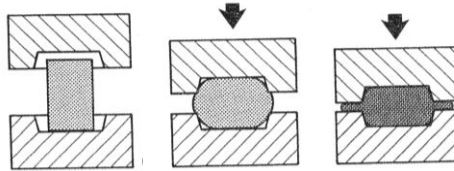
Schematic of PCF a) repress and b) upset forging [78].
